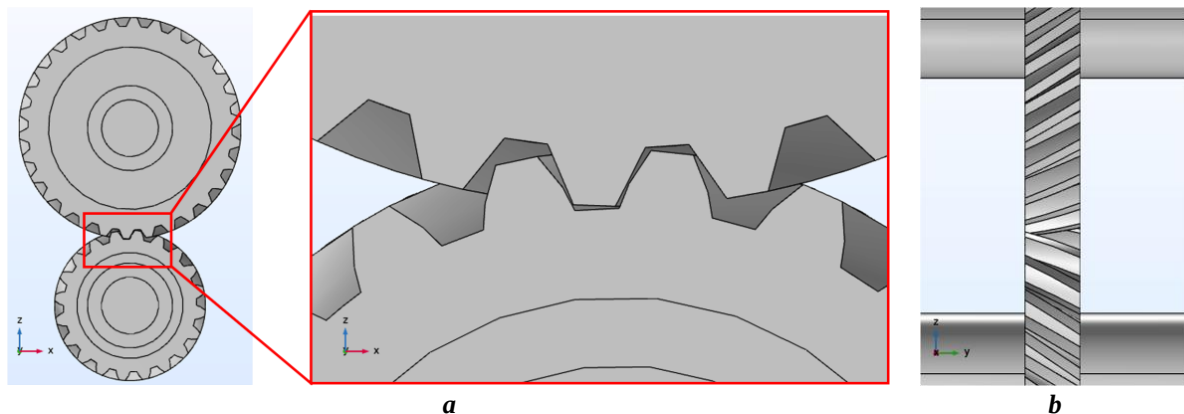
The pinion and gear wheel gearing of the helical gear: a – view on the XZ plane with a detail drawing and b – view on the YZ plane.
